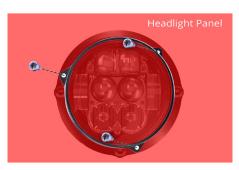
Insert a ¼ x 1.5 in. screw through the mounting ring hole, then through one of the supplied springs and then into the headlight panel hole.
